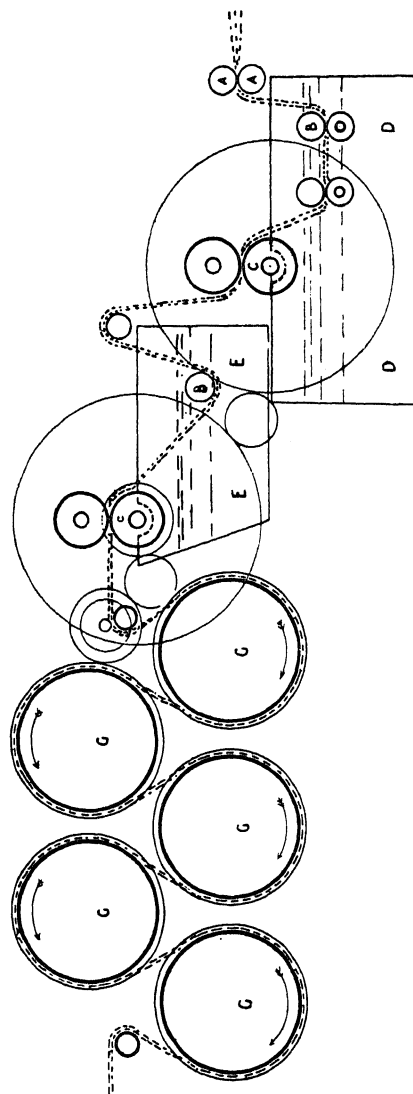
SECTION OF BACKWASHING MACHINE.
